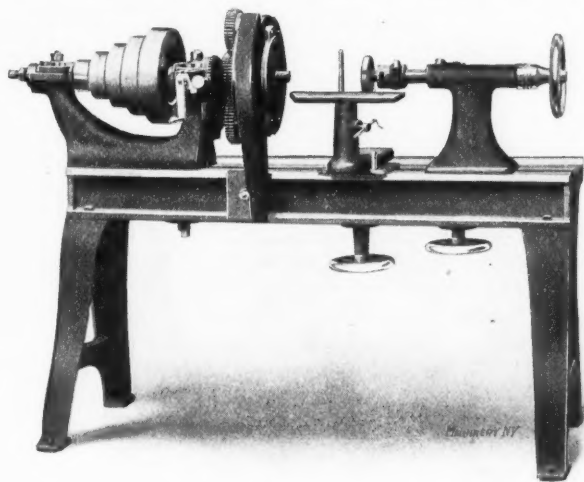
Elliptical Chuck mounted on Spinning Lathe
